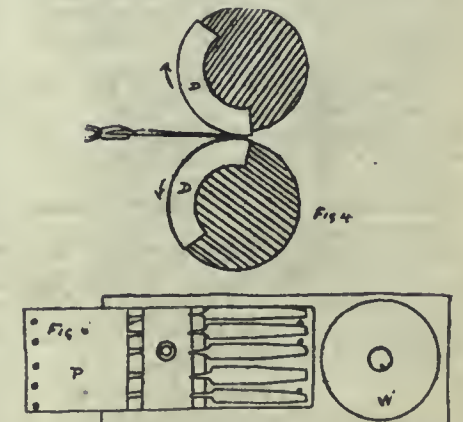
ROLLING BLANKS. FIG. 6—SURFACE GRINDING.
